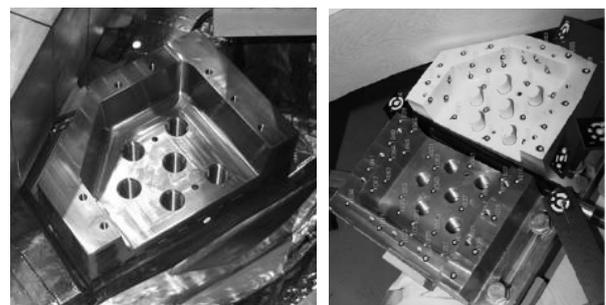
Coil block welded to NPC5 (left). Coil blocks of a test mock-up simulating assembly conditions (right) with reference marks for photogrammetric scanning.
